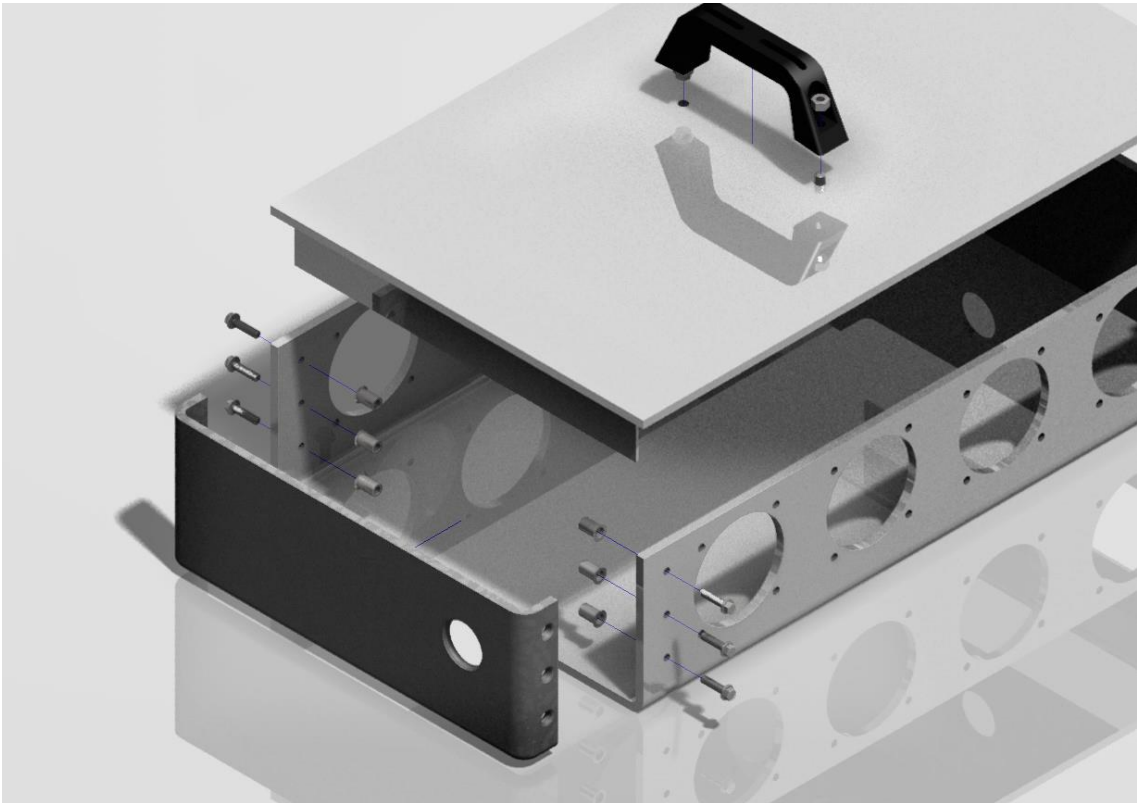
The exploded-view of the fully assembled ESS enclosure.
